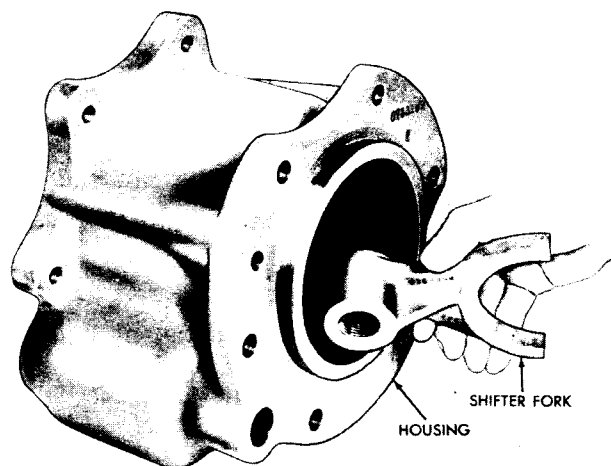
Removing (or installing) shifter fork^{S2471}
